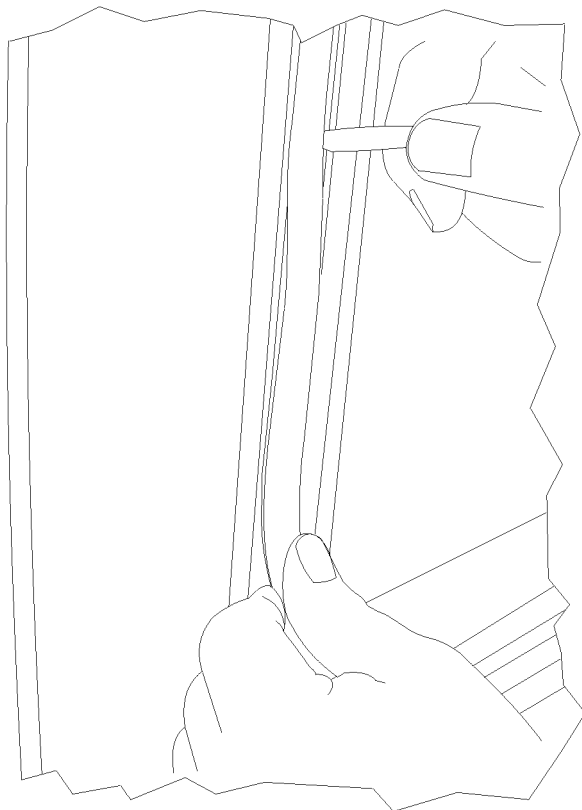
QUILL ASSEMBLY INSTALLATION
